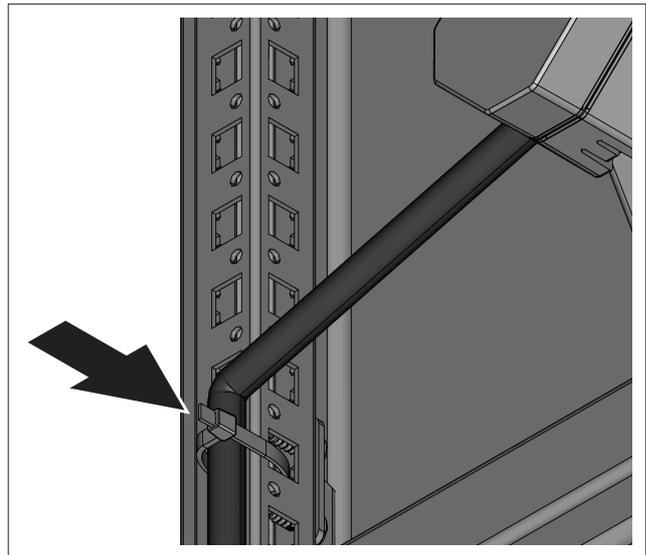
Cable fastening with cable ties on the enclosure frame (example)
